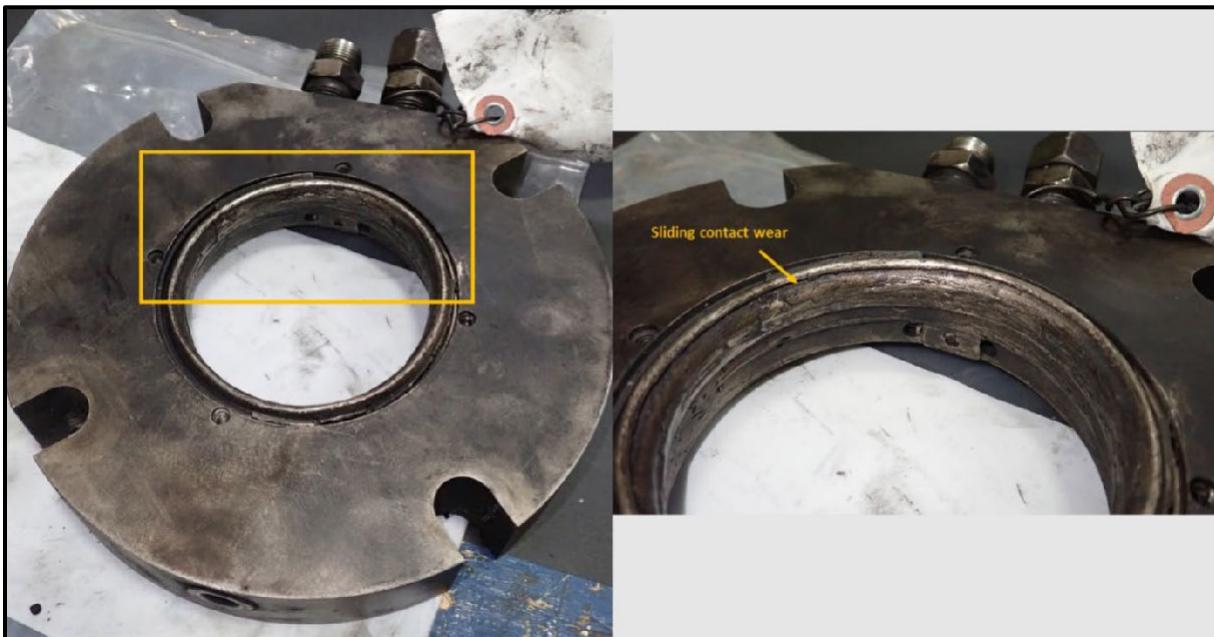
Smear metal on inside surface of seal gland that indicates sliding contact with the pump shaft. (Credit: Stress Engineering)
